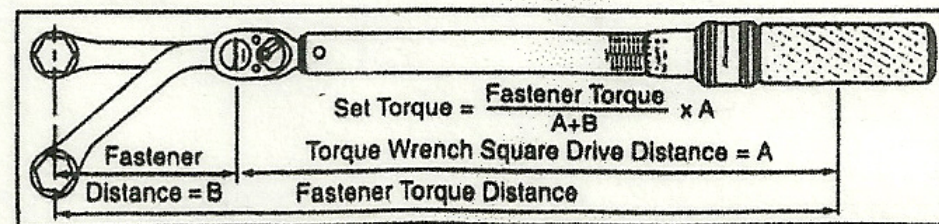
Fastener torque is greater than torque wrench square drive torque.
